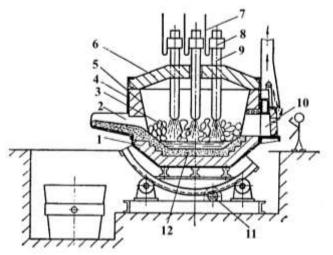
Direct-arc furnace: 1 – fire-proof bricks, 2 – taphole; 3 – charge; 4 – steel shell; 5 – lining; 6 – roof; 7 – flexible cable; 8 – clamp; 9 – electrode; 10 – window; 11 – tilting mechanism; 12 – bottom
